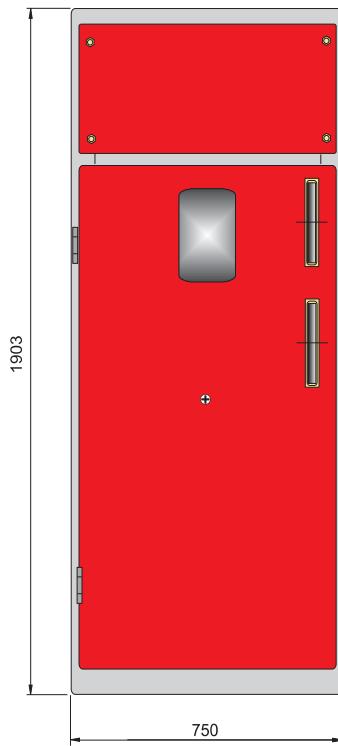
Side view of Bus sectionalizer panel FÜ24-606519-72
